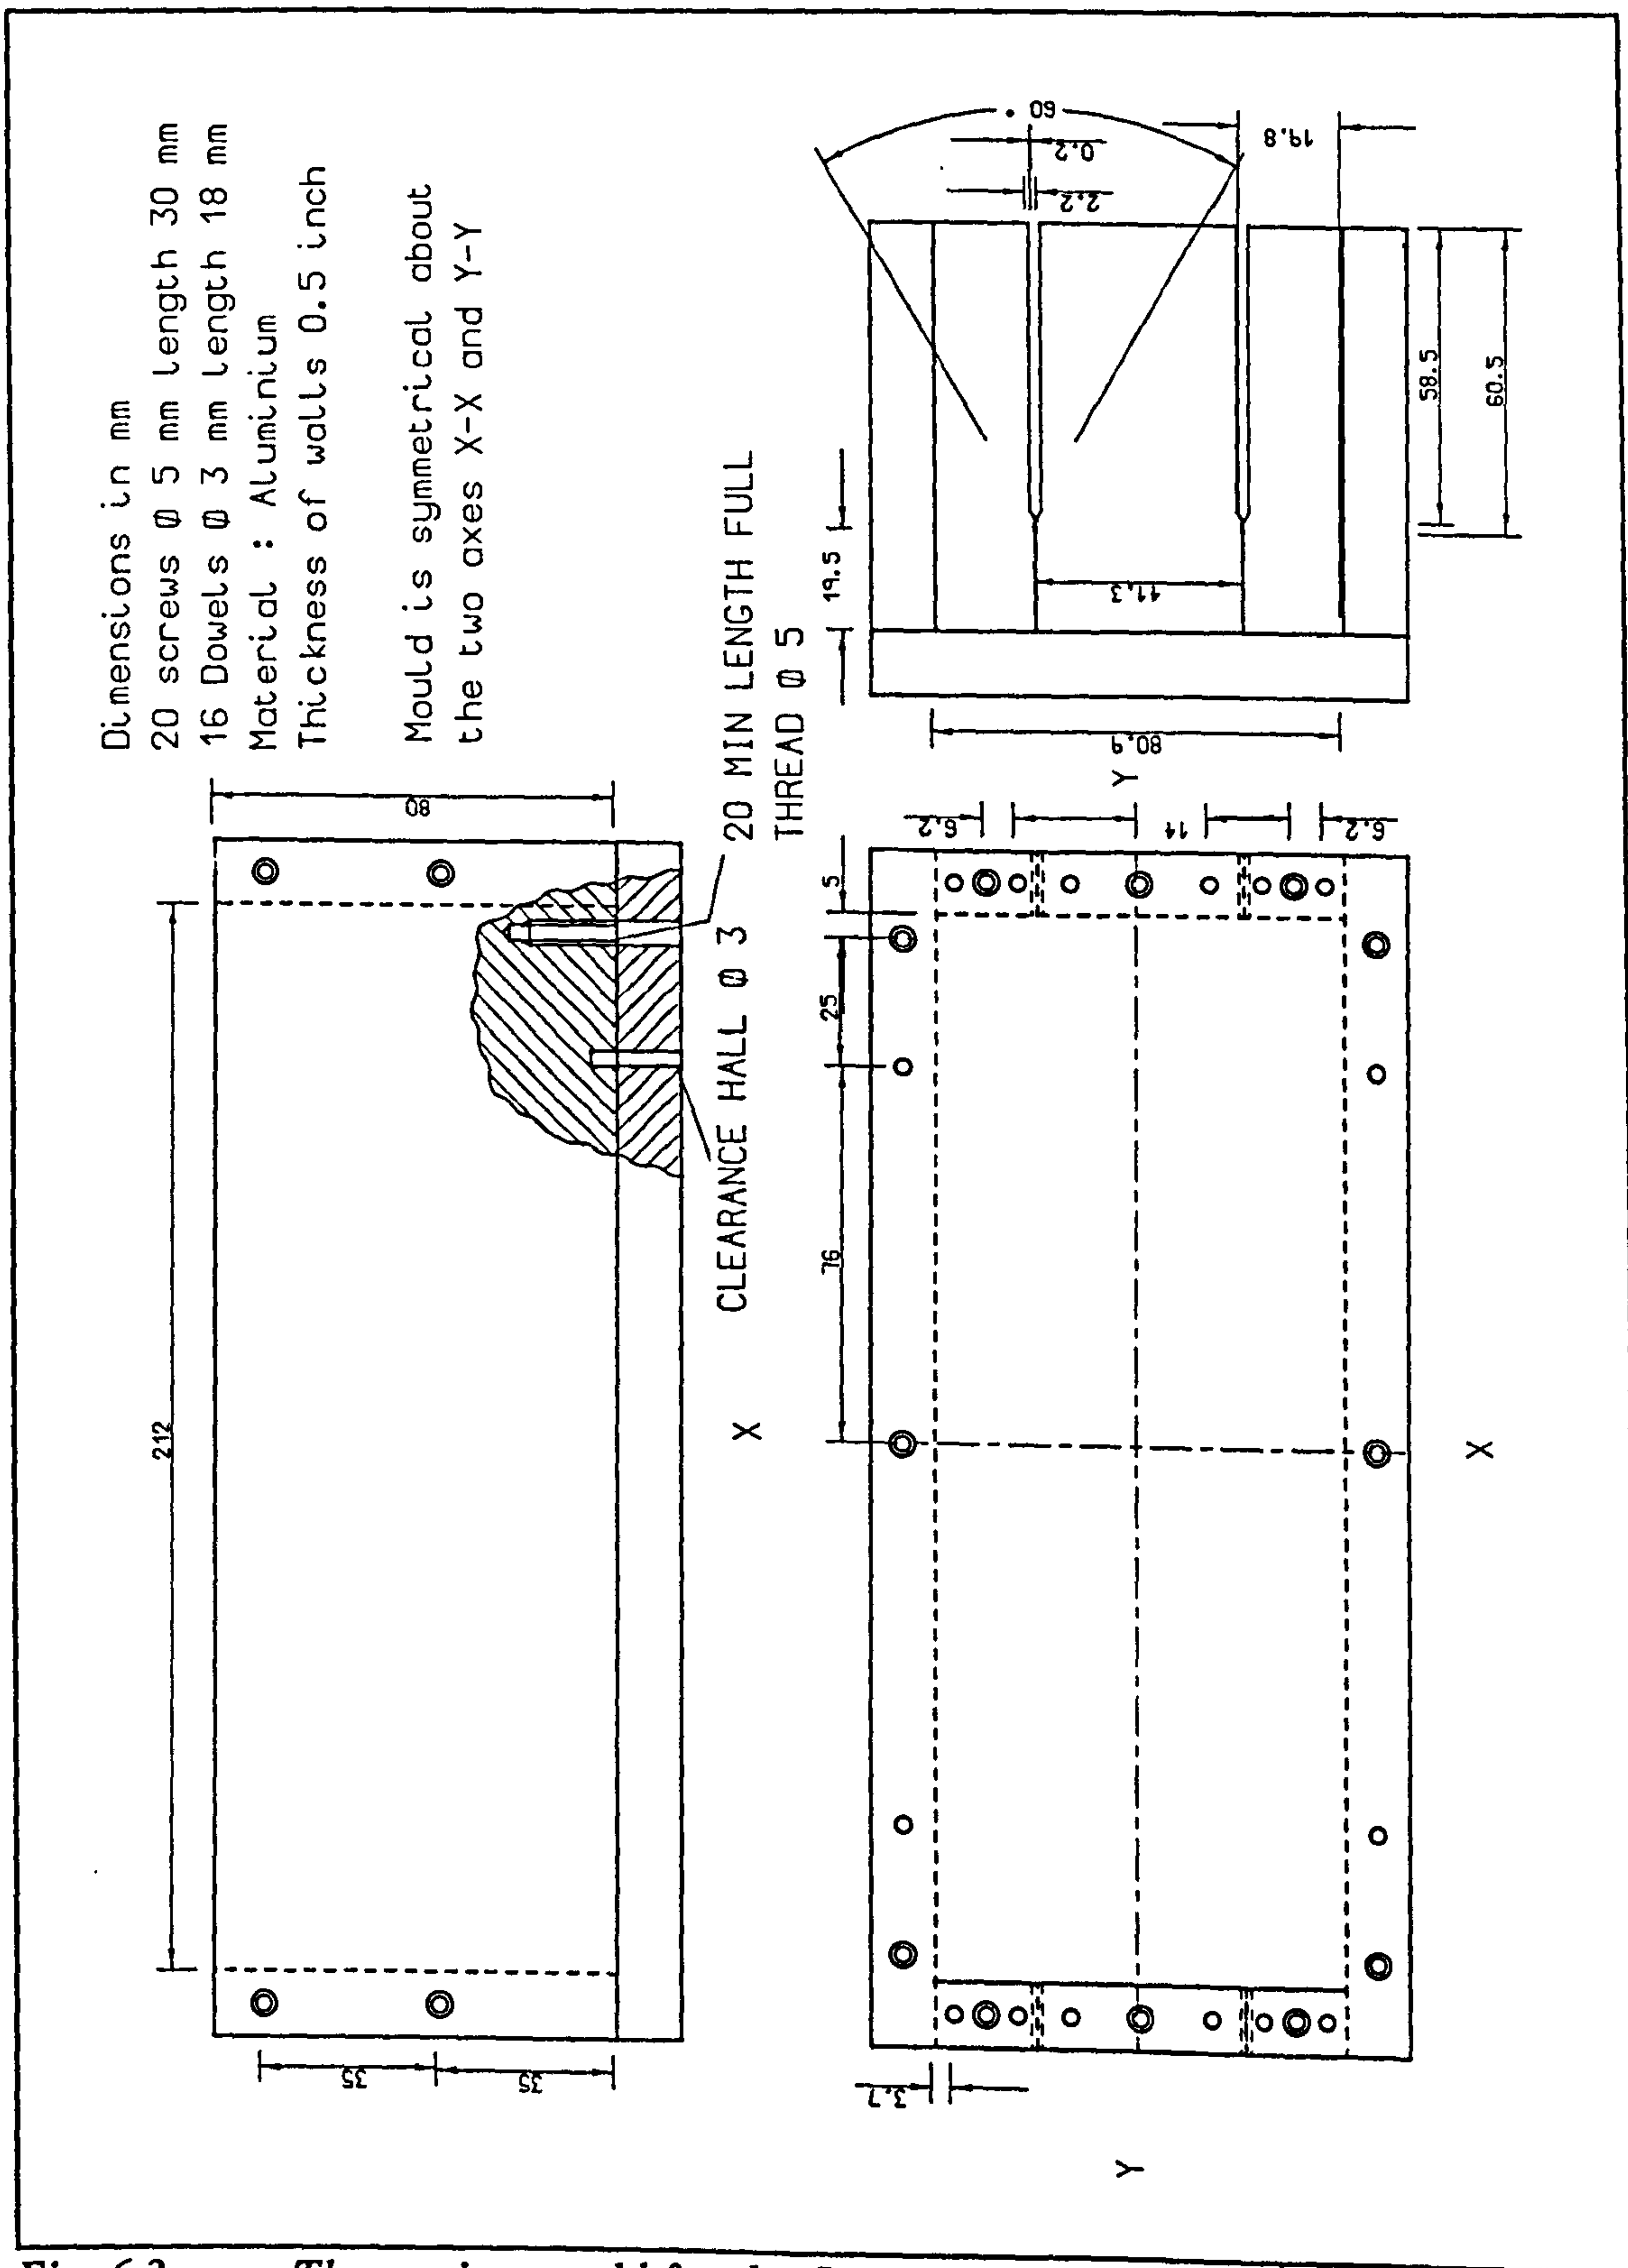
The casting mould for the CMM specimen, shown without the shim or the trapping plates.
